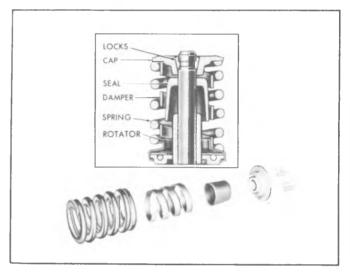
A-28V-Exhaust Valve Spring Installation (Mark IV)
